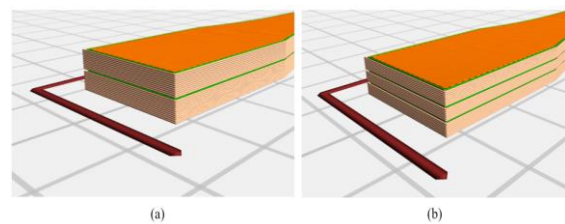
(a) Single layer removed in the Gcode. (b) Double layer removed in Gcode
